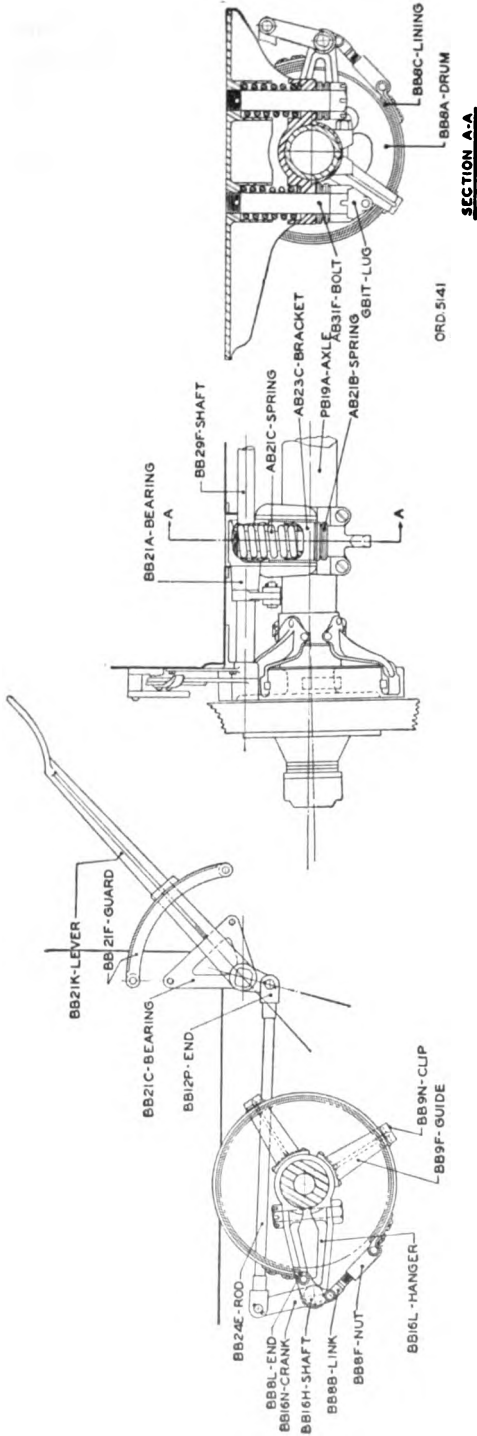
75-mm gun calsson, M1918, band brake and calsson carrying springs
